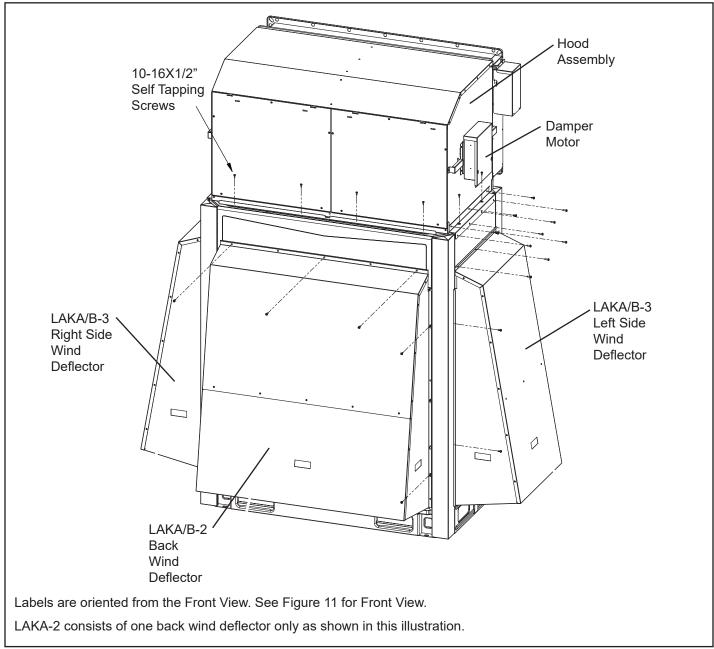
Attach Hood and Wind Deflectors Using Provided Screws
